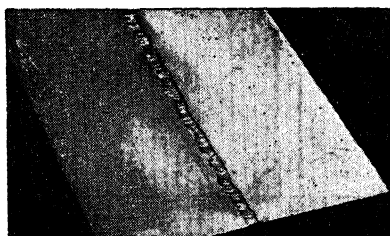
Butt weld in 14 gauge aluminum.
